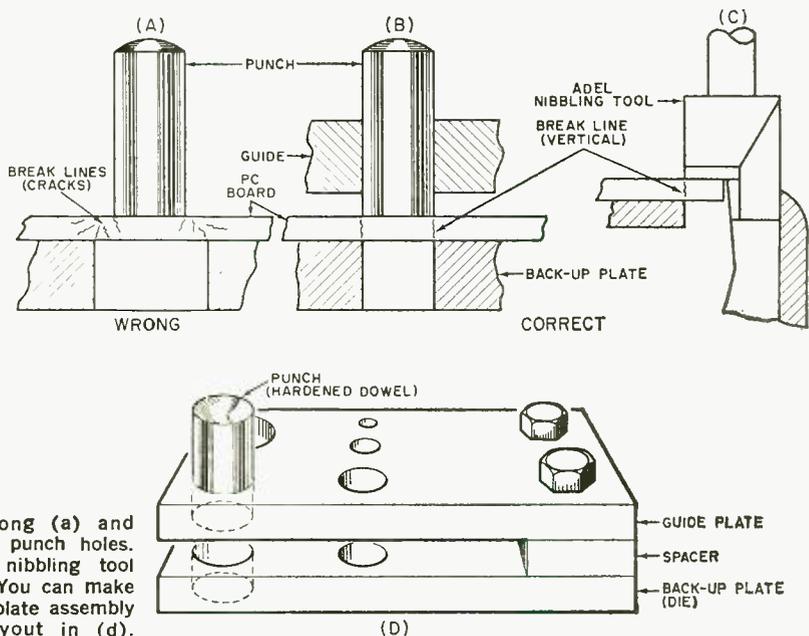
The wrong (a) and right (b) way to punch holes. Operation of a nibbling tool is shown in (c). You can make your own punch plate assembly by following layout in (d).
